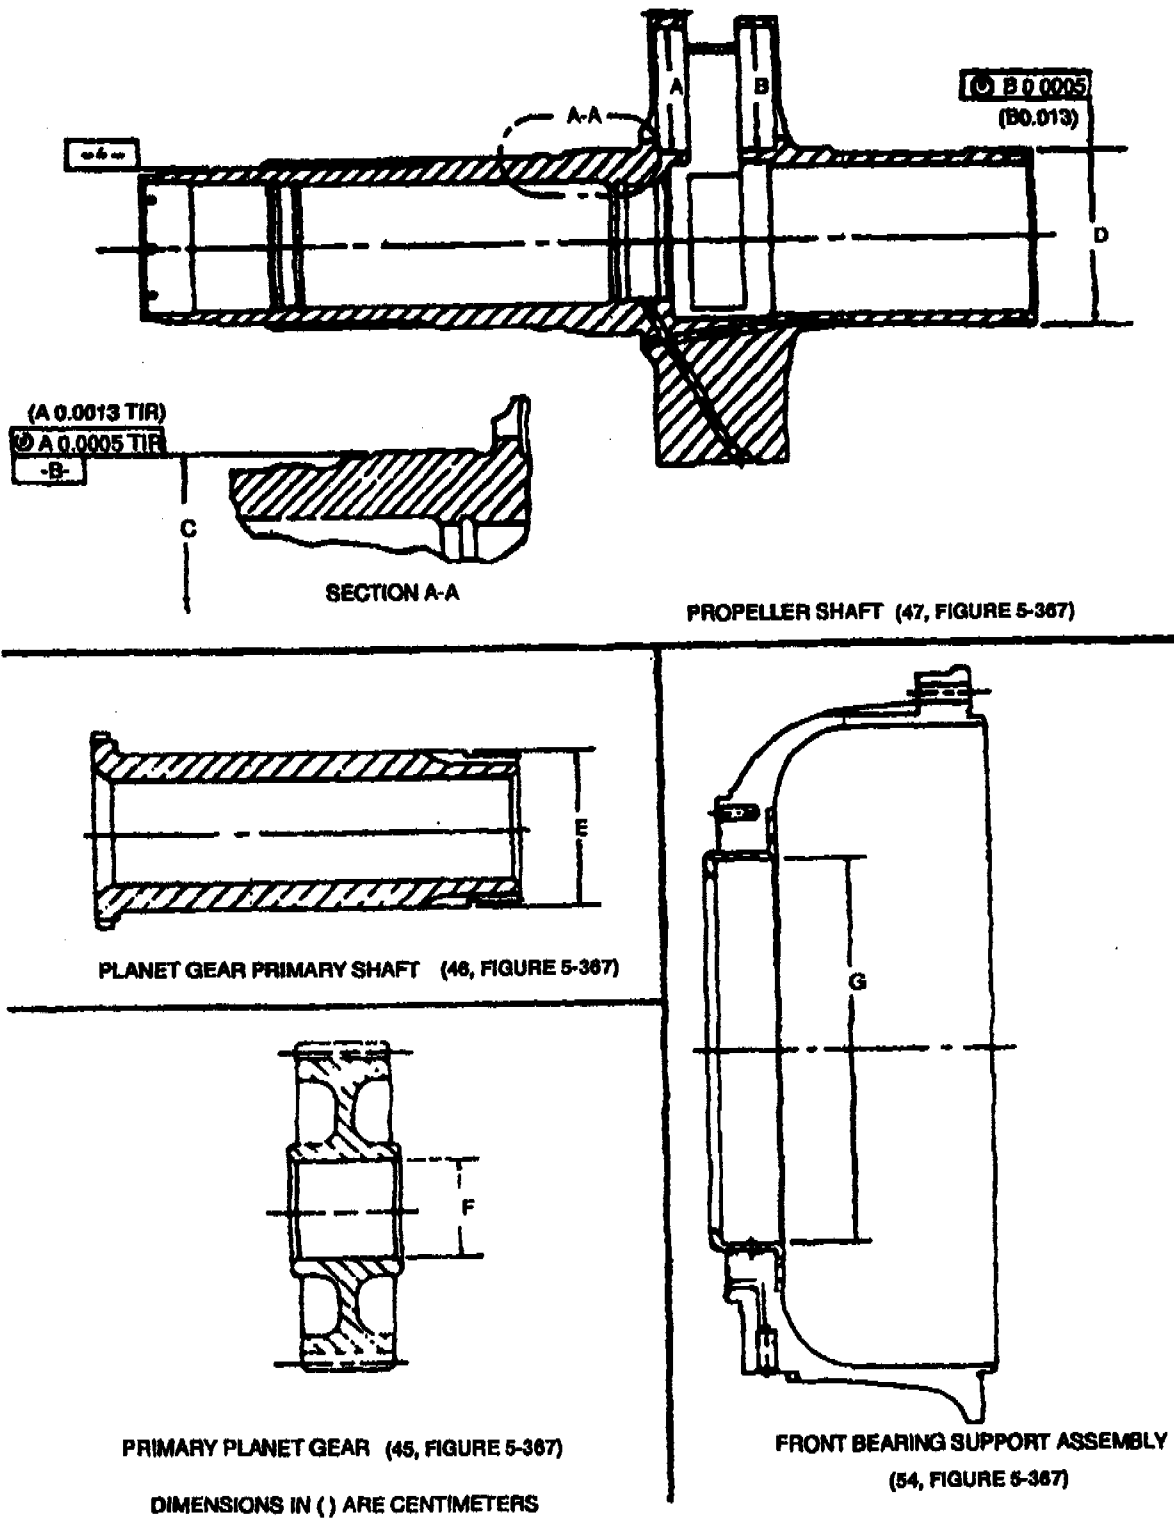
Primary Reduction Gear Assembly Dimensional Inspection Locations (T53-L-701, -701A) (Sheet 1 of 3).
